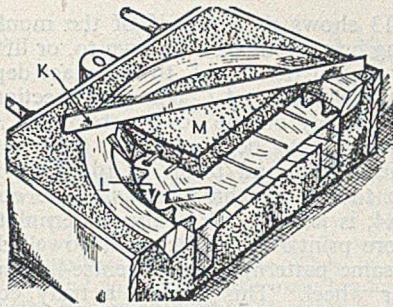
Part Mould for the Gear Wheel after Rolling Over; Core-sand is packed and reinforced in the Top Recess at (M).
